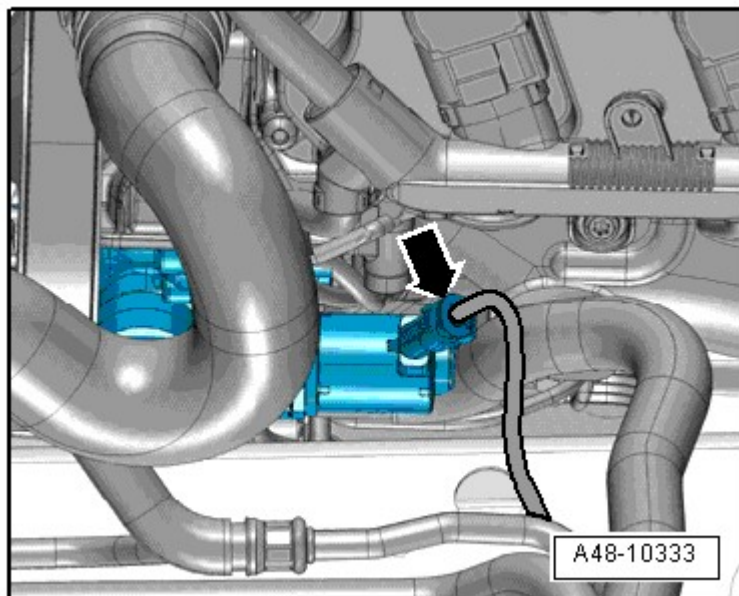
Disconnecting Connector -Arrow- From Power Steering Pump
